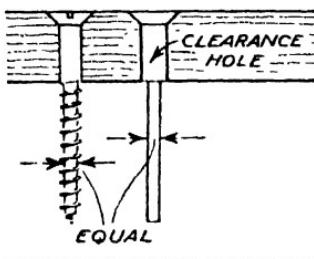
SIZES OF HOLES BORED WHEN SCREWING.
